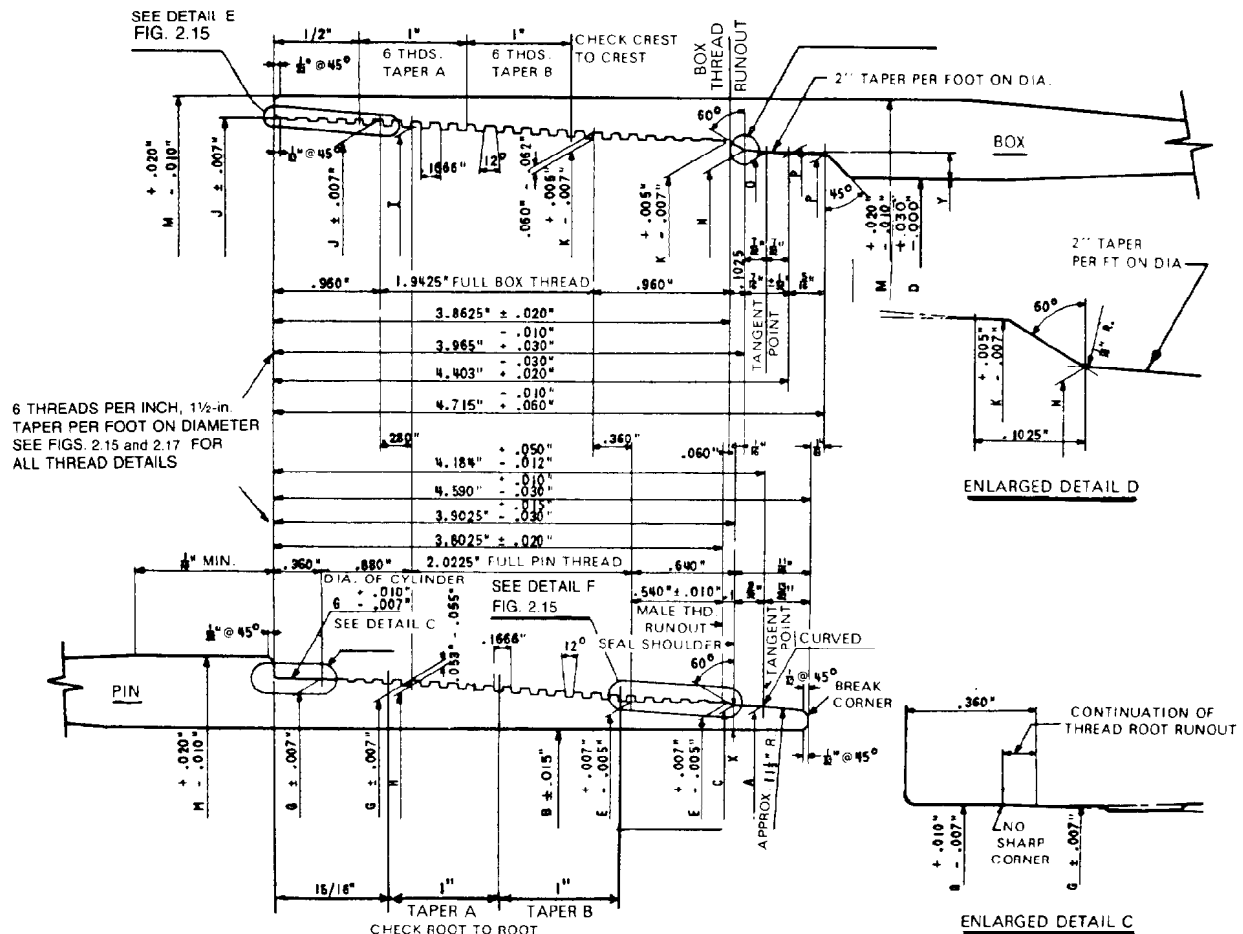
Machining details, extreme-line casing joint sizes 5 through 7 $\frac{5}{8}$ in.
